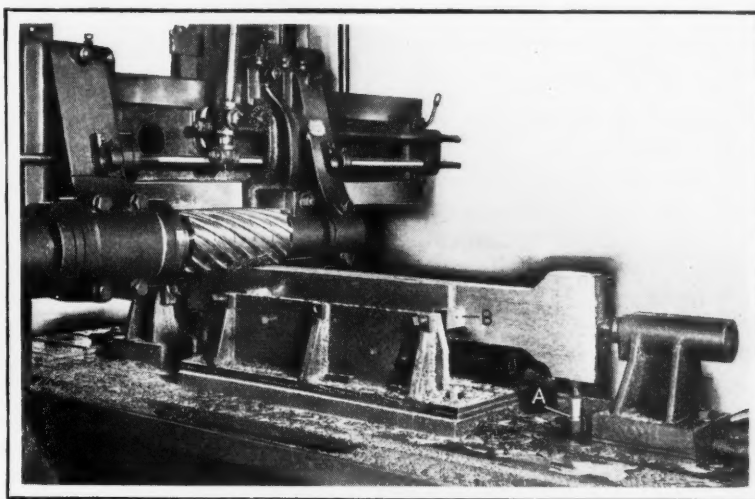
Cross-head Guide Being Milled Preparatory to Grinding
